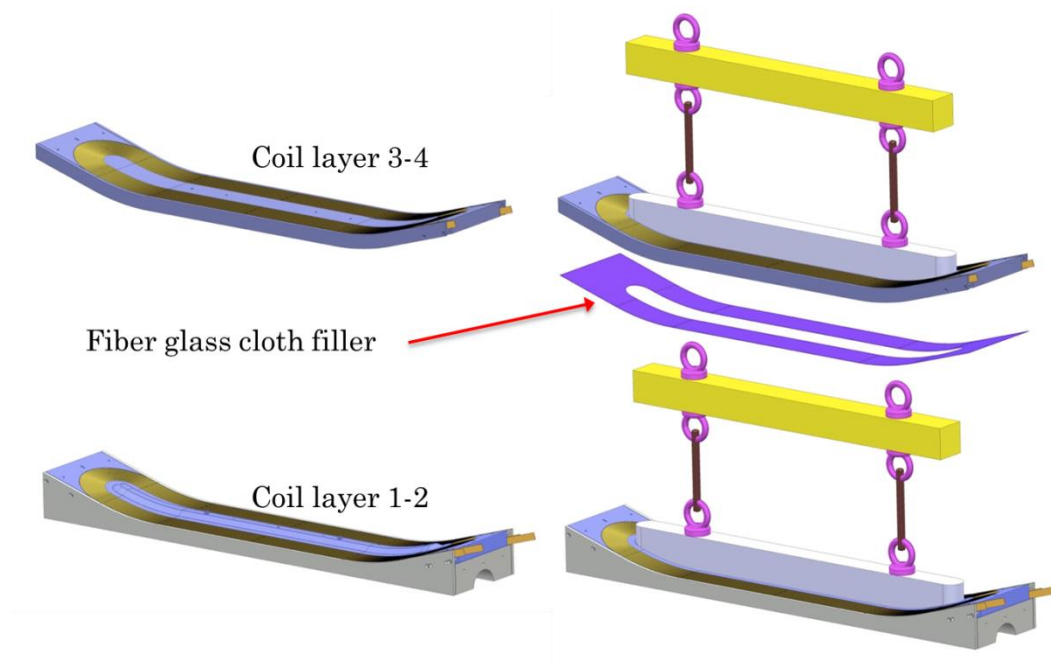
Coil assembly sequence: coil 3-4 on coil 1-2.
